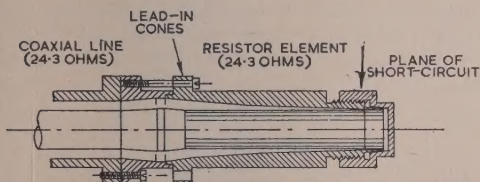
Section of experimental "terminal" resistor mount, of 24.3 ohms.
